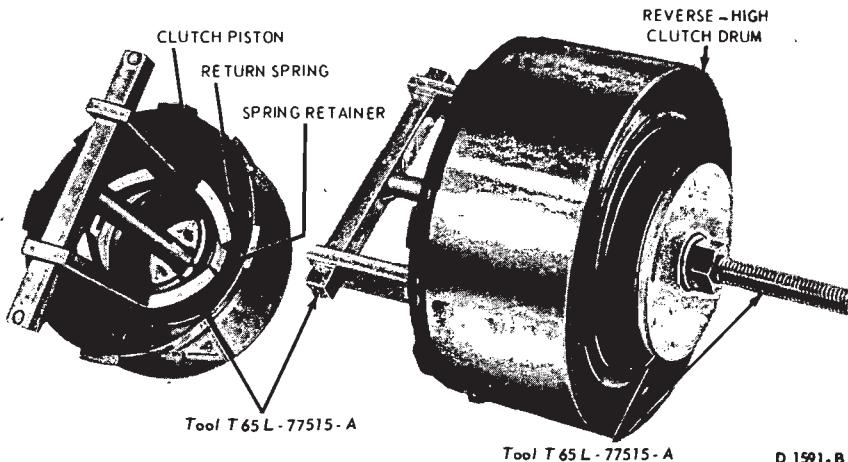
Removing or Installing Reverse—High Clutch Piston Spring Snap Ring
